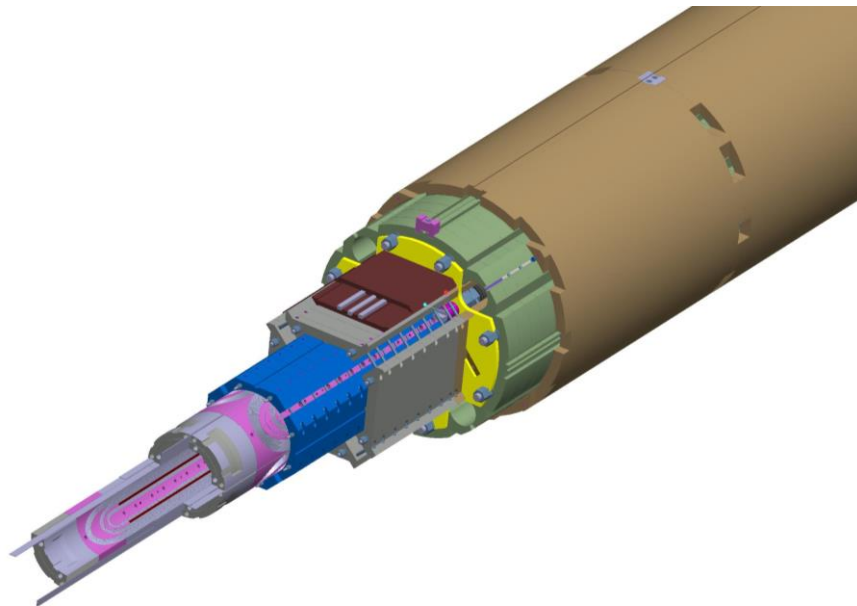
3D exploded view of the end of an MQXF magnet (axial end loading and splice connection components not shown).
